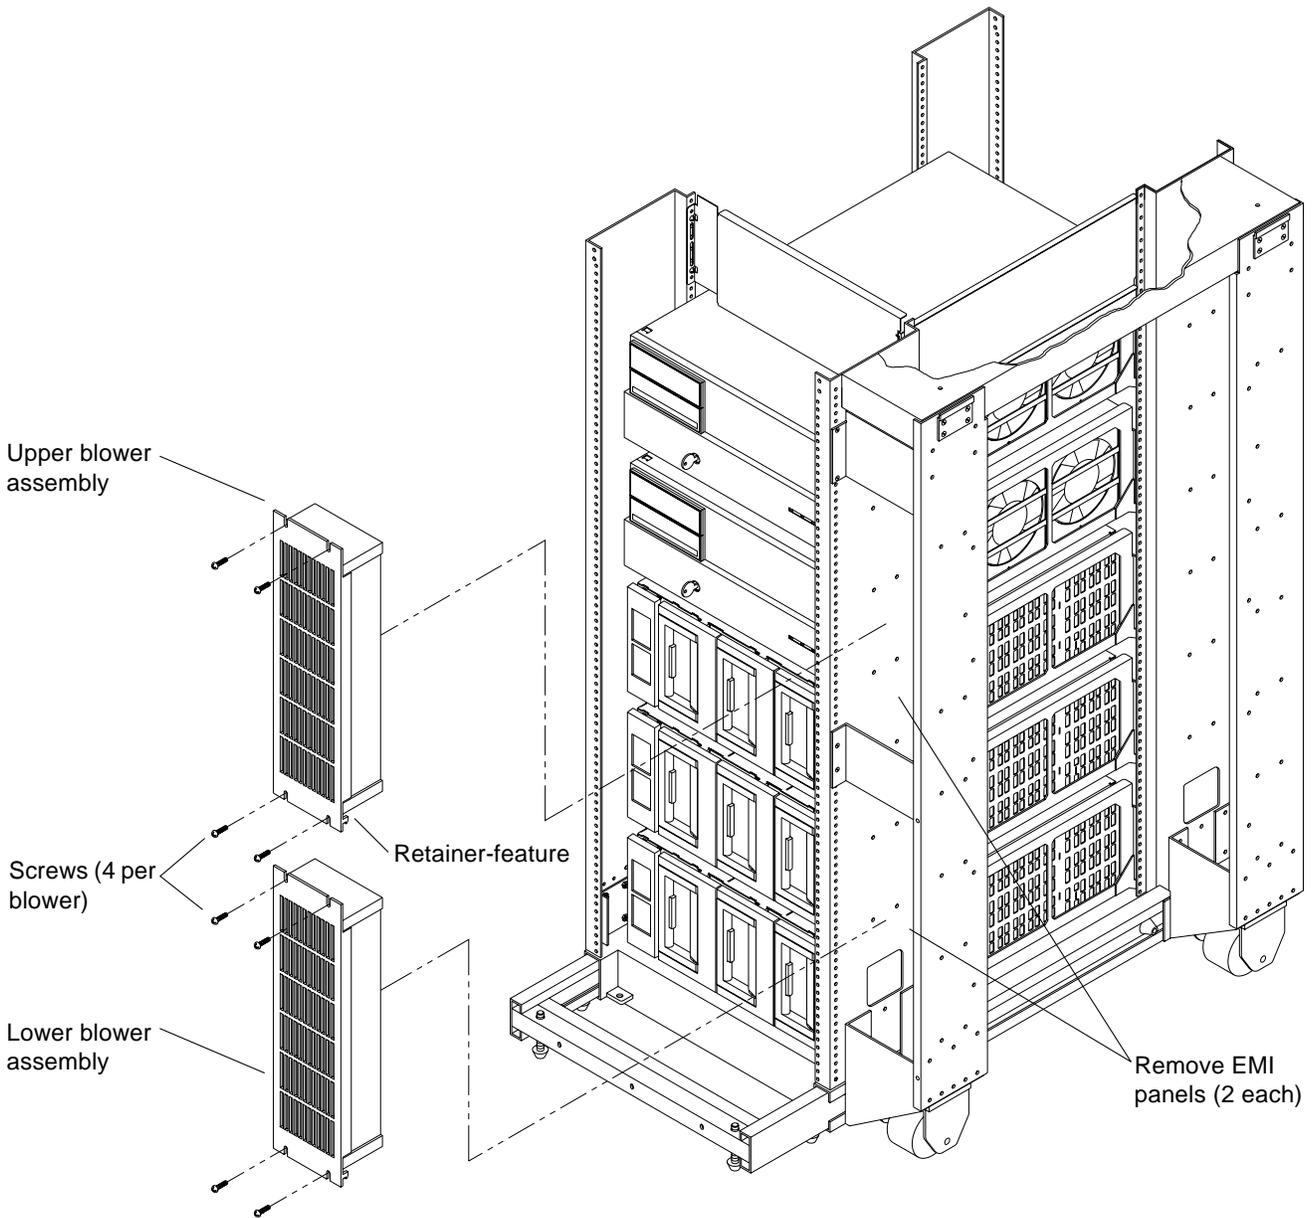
Installing the Blower Assembly in the SPARCcluster 1000 High Availability and Expansion Cabinet
